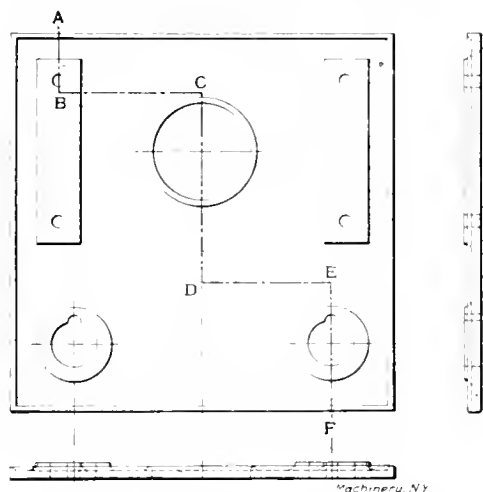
Type of Drawing used for the Elementary Exercises in Blue-print Reading
